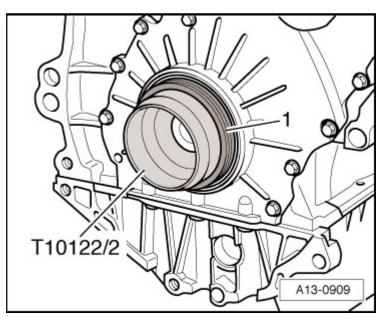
Inserting Guide Sleeve T10122/2 With Oil Seal Onto Crankshaft Courtesy of AUDI OF AMERICA, LLC
